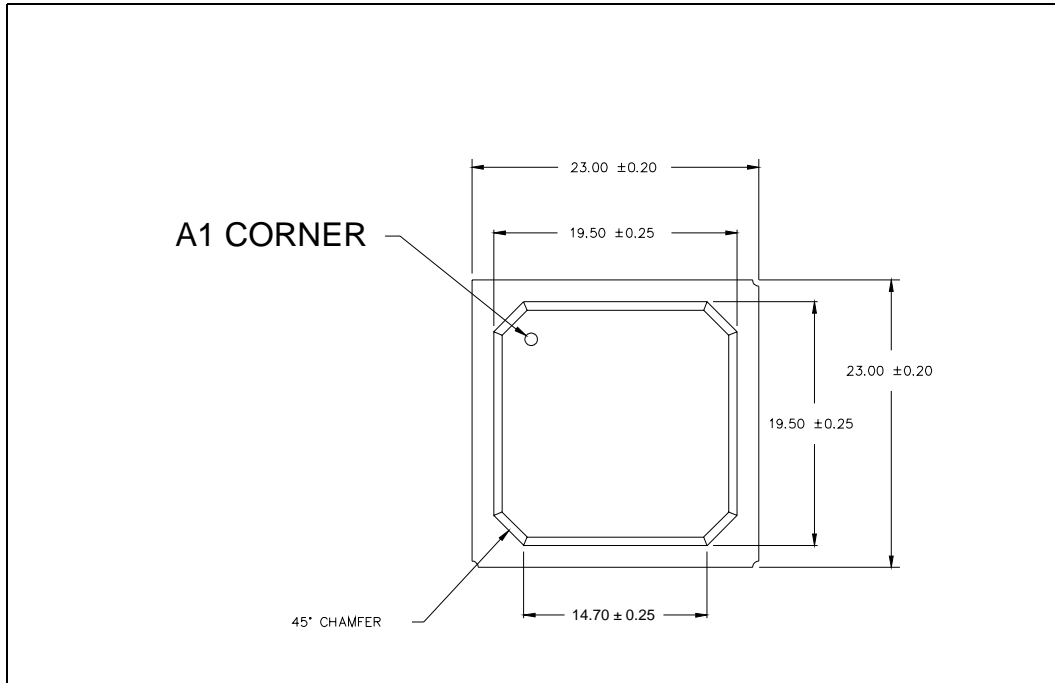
23x23 mm PBGA Marvell® PXA270 Processor Package (Bottom View)
